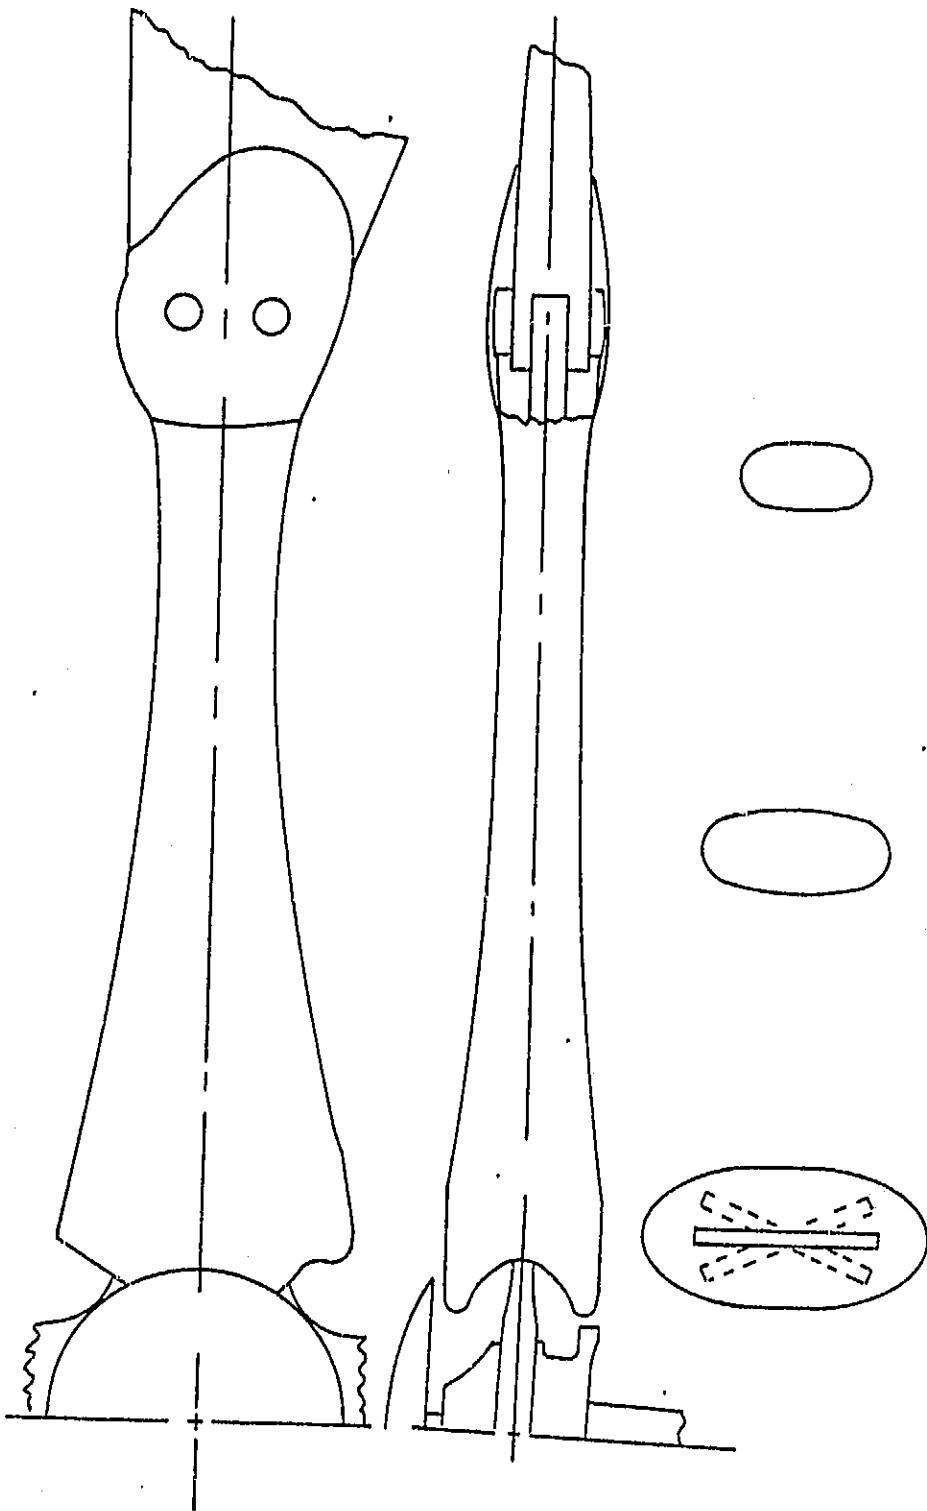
FRR Cuff Shape for Bearingless Hub With Dampers
